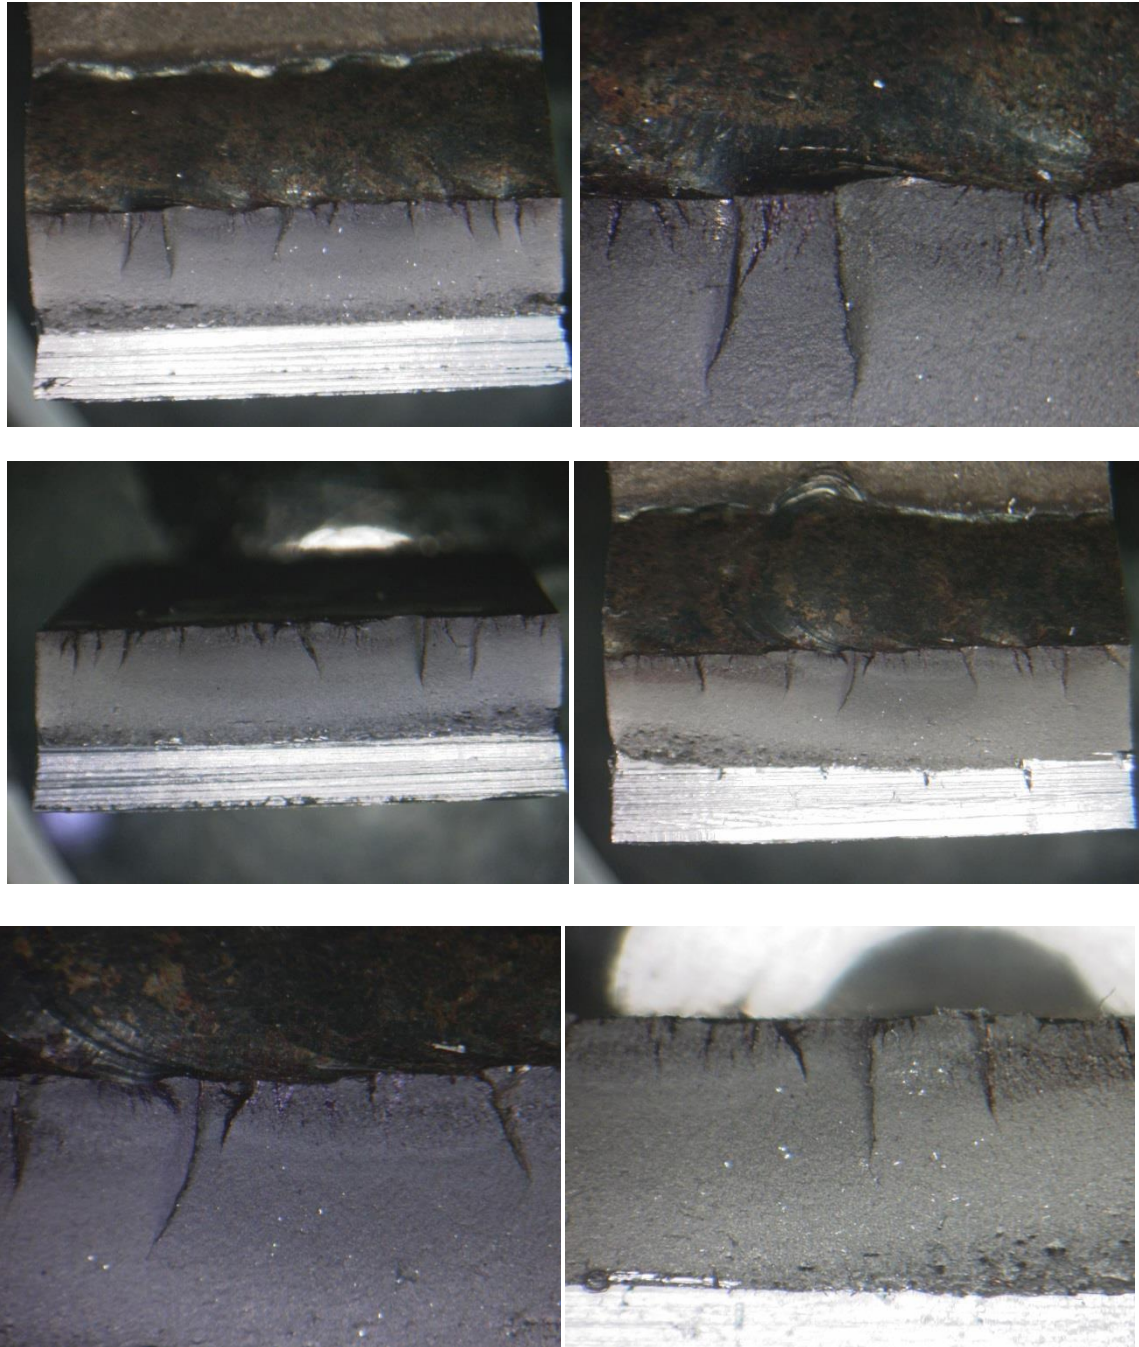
Examples of fracture surface from 10 mm plate thickness with zero gap
